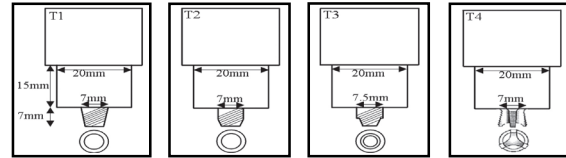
Geometry and technical details of the investigated tools [Salari 2014]
